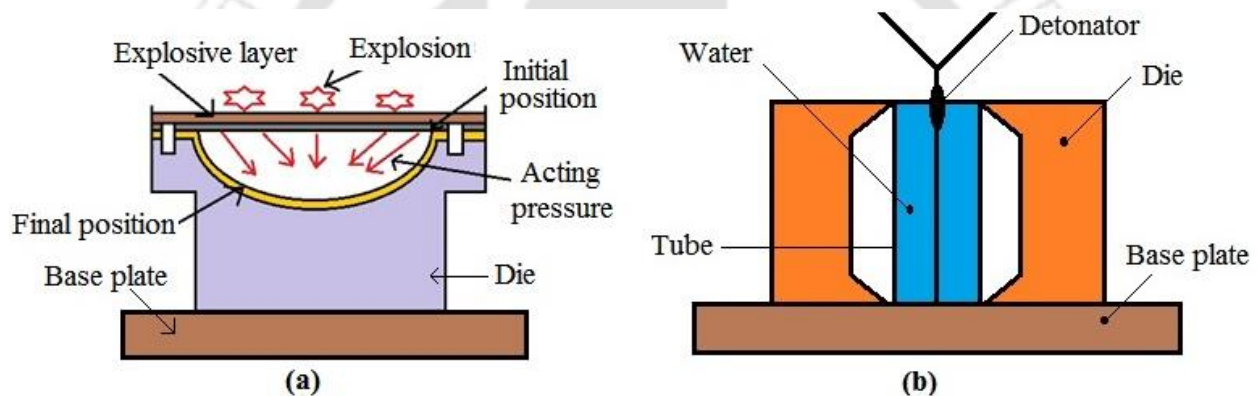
2 Schematic representation of (a) sheet and (b) tube explosive forming process
